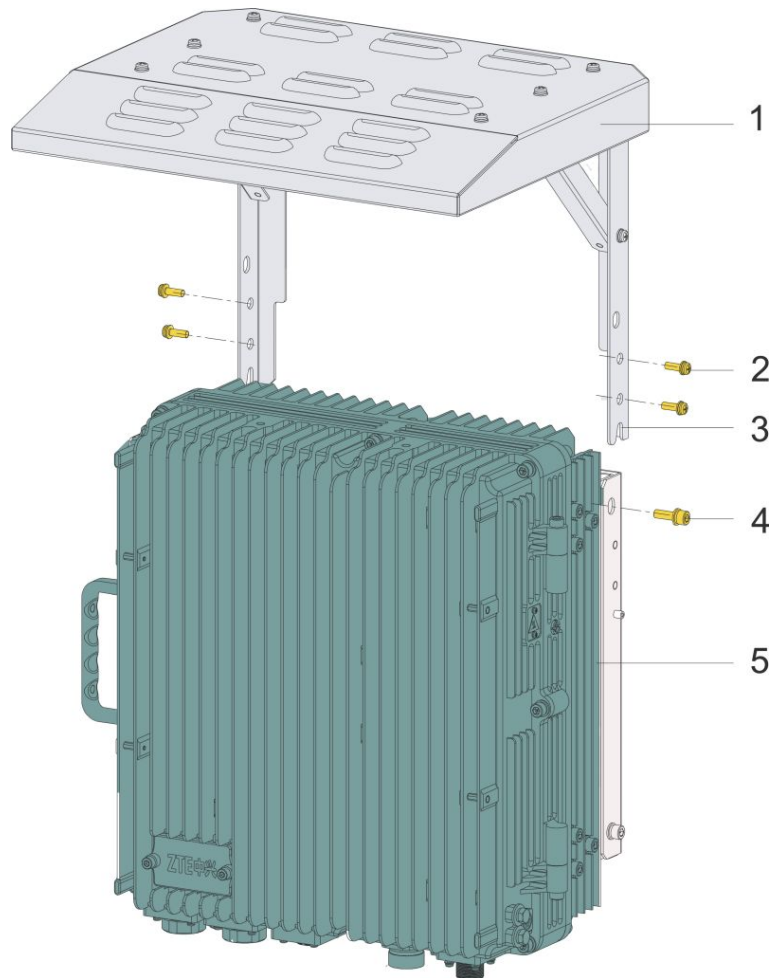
ASSEMBLING SUN SHIELD (2)
